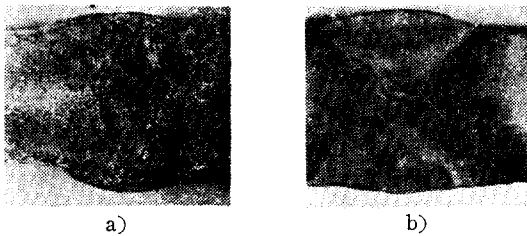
Cross-sections of Aluminum 6063 and 7075 alloy welds
